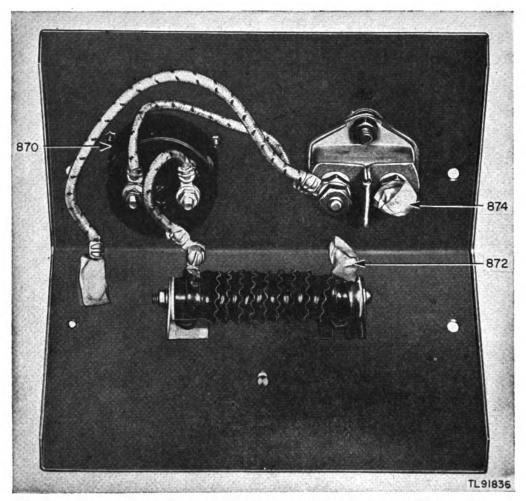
Control box for Power Units PE-49-F and PE-49-G, interior of top covershowing parts masked.
